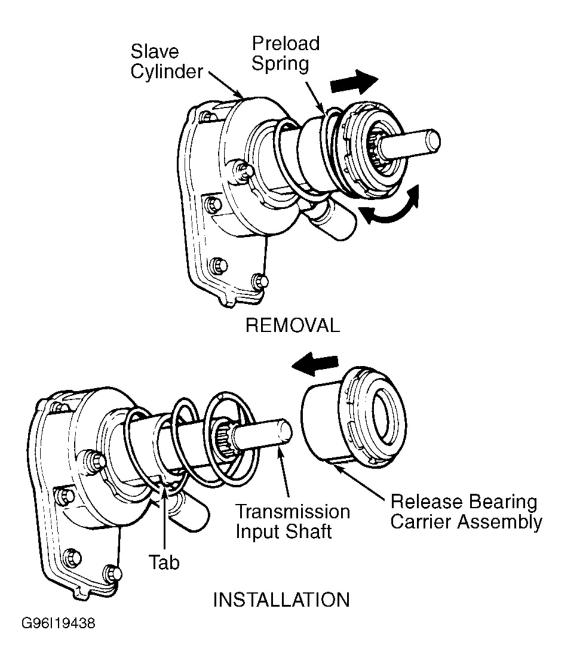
Servicing Clutch Release Bearing (B2300, B2500, B3000 & B4000) Courtesy of FORD MOTOR CO.
